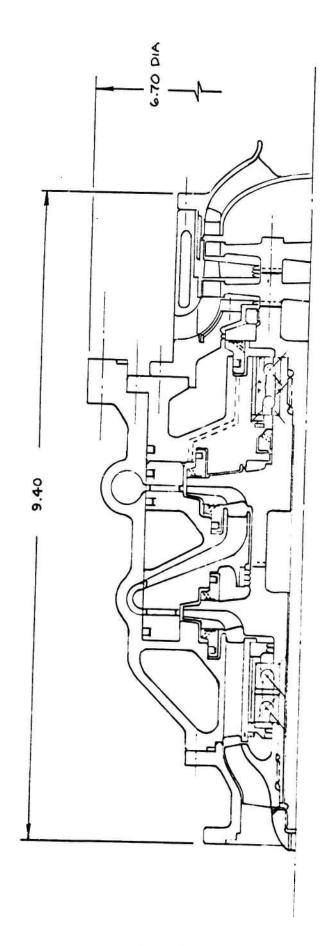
10K Fuel Turbopump Concept, III - Front-to-Back Shrouded Impellers
